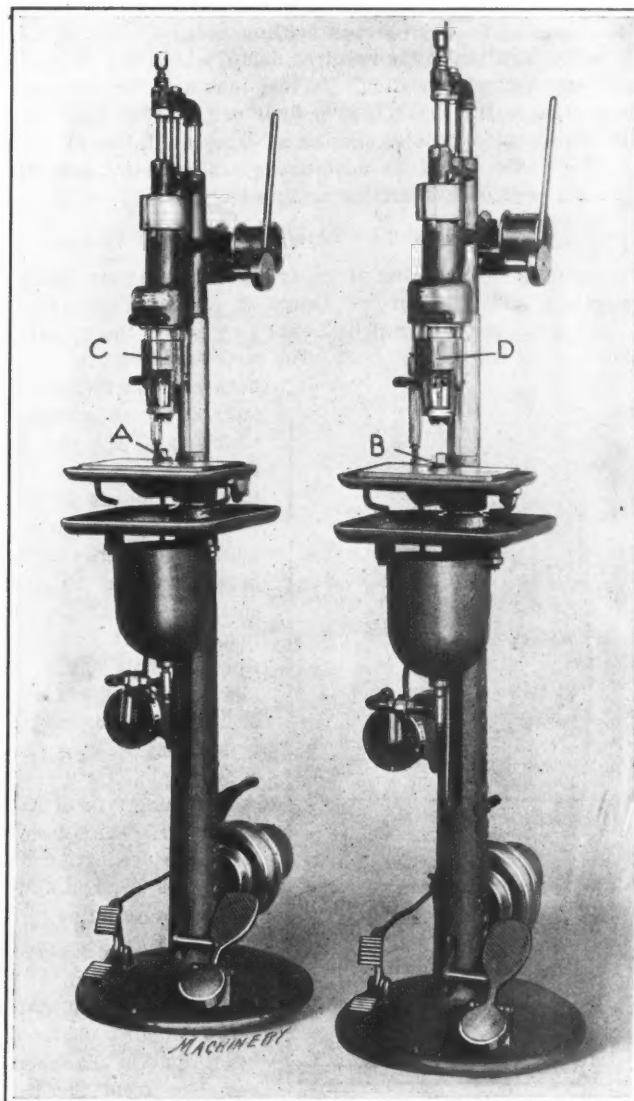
Drilling Machines that drill Two Holes in Percussion Plunger
